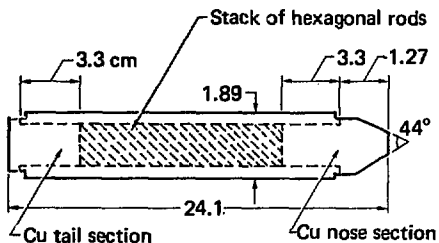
Billet used in hydrostatic-extrusion experiments.
